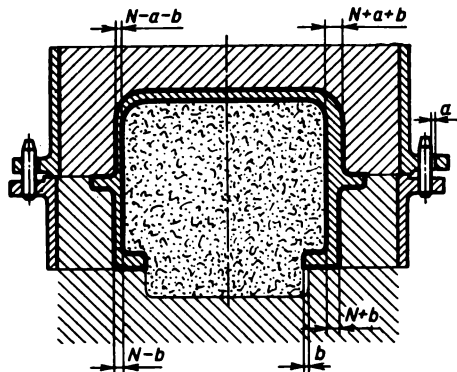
Appearance of inaccuracies in casting in two moulding boxes
